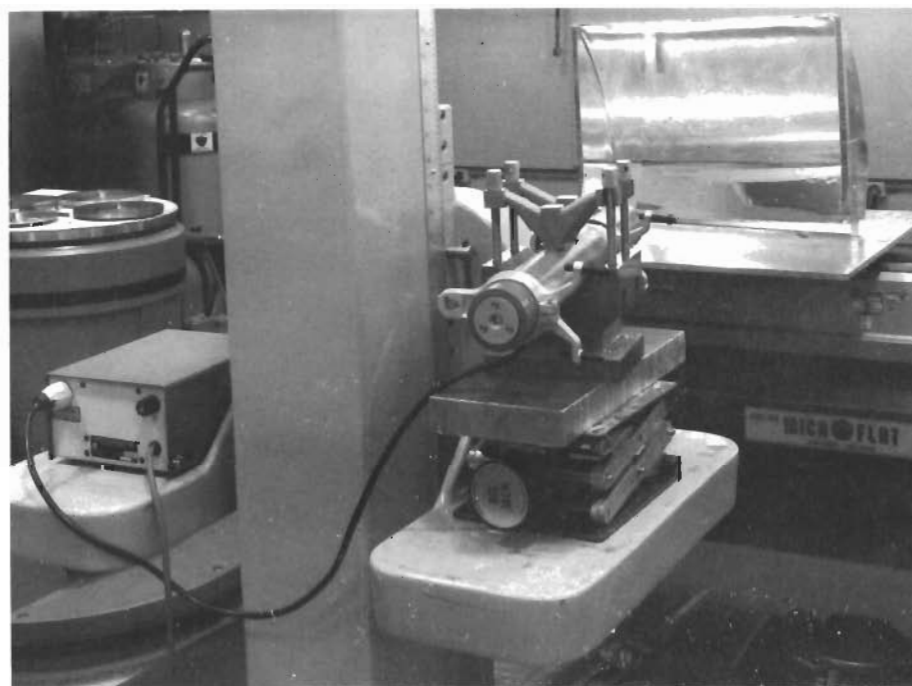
Laser Beam Checkout of Secondary Shield Assembly
